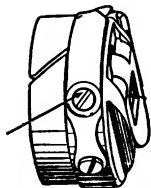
Position of the tension-regulating screw on the bobbin case of the rotating Singer.
